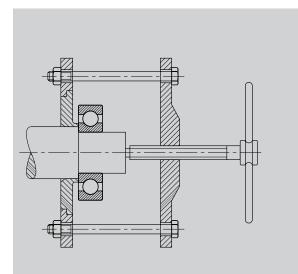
Dismounting of Ball Bearing by using a Extraction Tool
